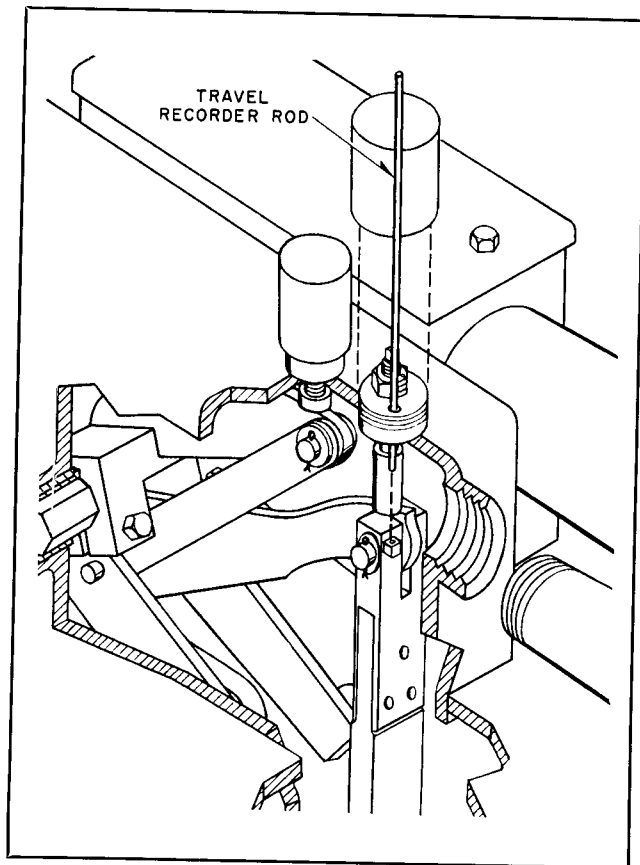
Inserting Travel Recorder Rod Through Pole Unit Mechanism Housing and Attaching to Lift Rod
